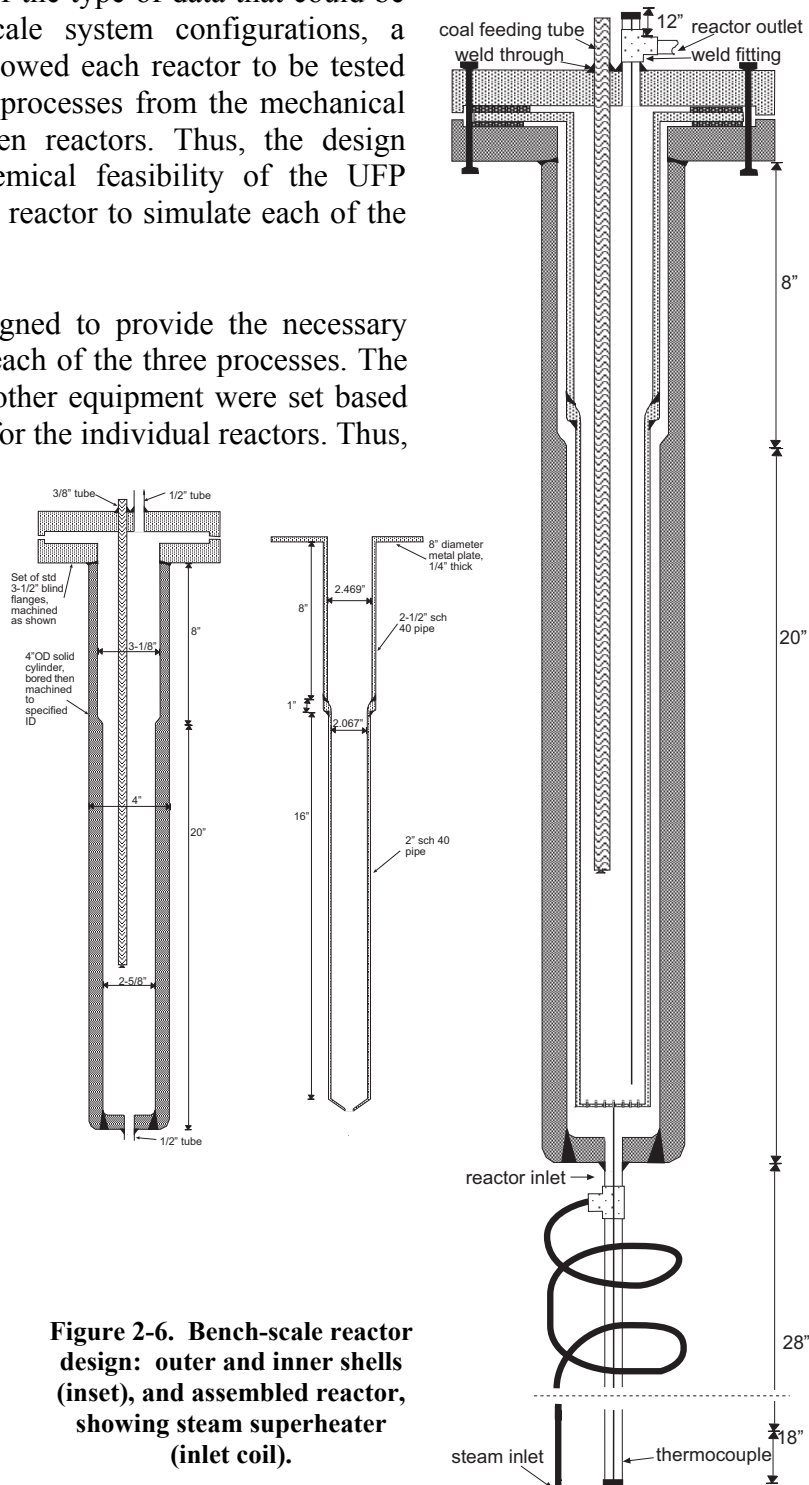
Bench-scale reactor design: outer and inner shells (inset), and assembled reactor, showing steam superheater (inlet coil).
